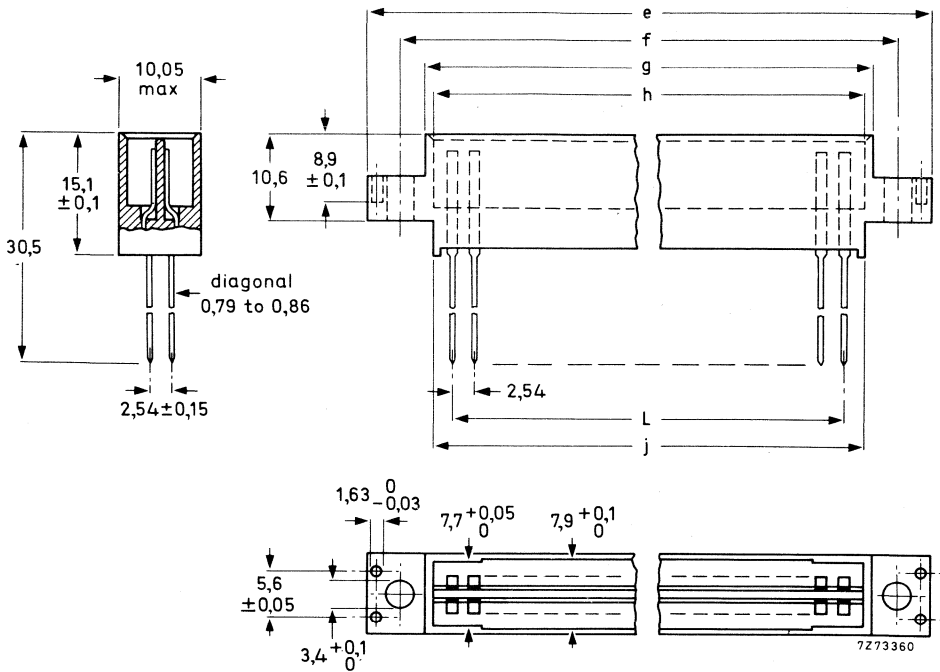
Panel part. See Table 2 for dimensions e, f, g, h, j, and L.
